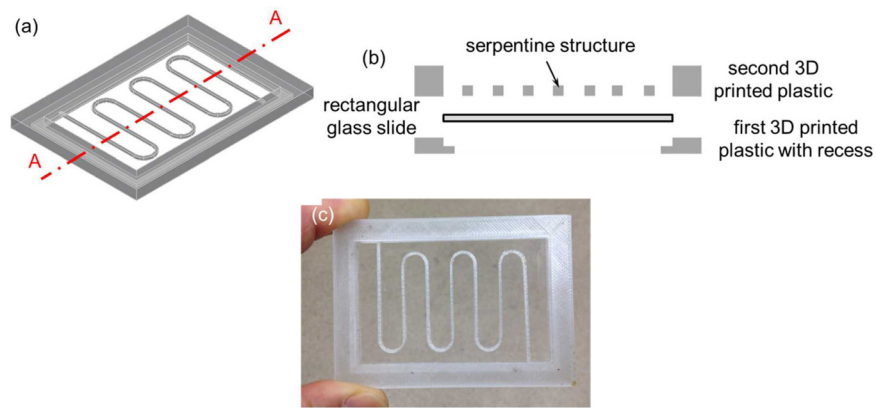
(a) 3D CAD model of a serpentine channel mold without the bottom rectangular glass slide. (b) Schematic diagram of the exploded cross-sectional view of Section A–A depicted in (a) with the bottom rectangular glass slide. (c) 3D printed serpentine channel mold with the integrated bottom 75 mm \times 50 mm and 0.96 mm to 1.06 mm thick rectangular glass slide. The cross-sectional dimensions of the serpentine structure were 1 mm \times 1 mm.
